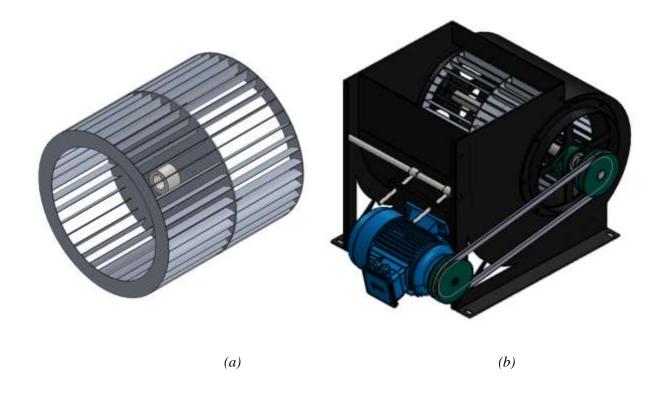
(a) 3D image view of the radial fan and (b) Assembly view of the radial fan and motor
